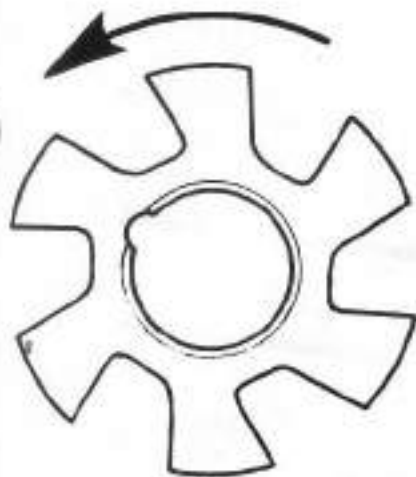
When reinstalling pump rotor, be sure it is installed so that it will turn in direction indicated by arrow.
